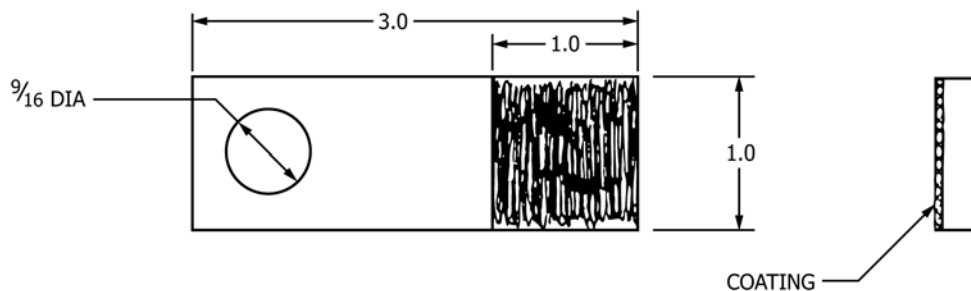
Lap Shear Specimen (Metal Coatings Only)
